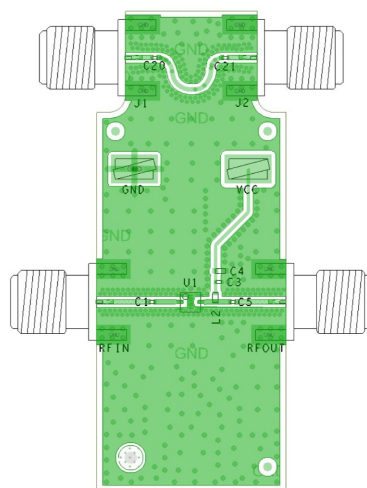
EV2HMC788ALP2 Assembly Drawing (J1 and J2 are Not Installed)
